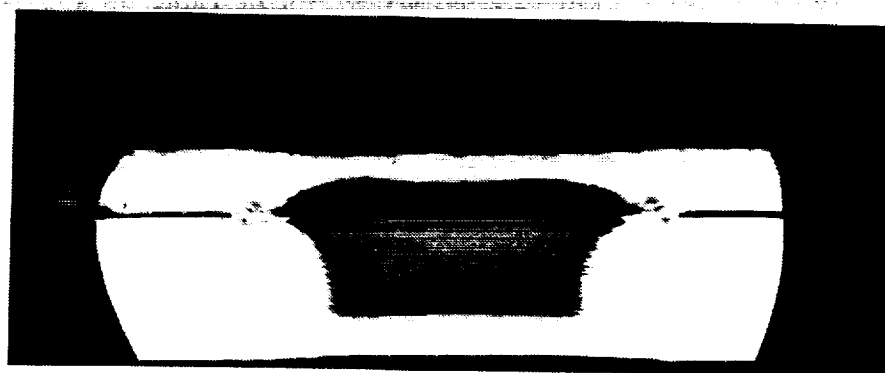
Spot Weld with Cracks and Voids Repaired in 0.090" 2090-T62 joined to 0.190" 2090-T83 Al-Li.
